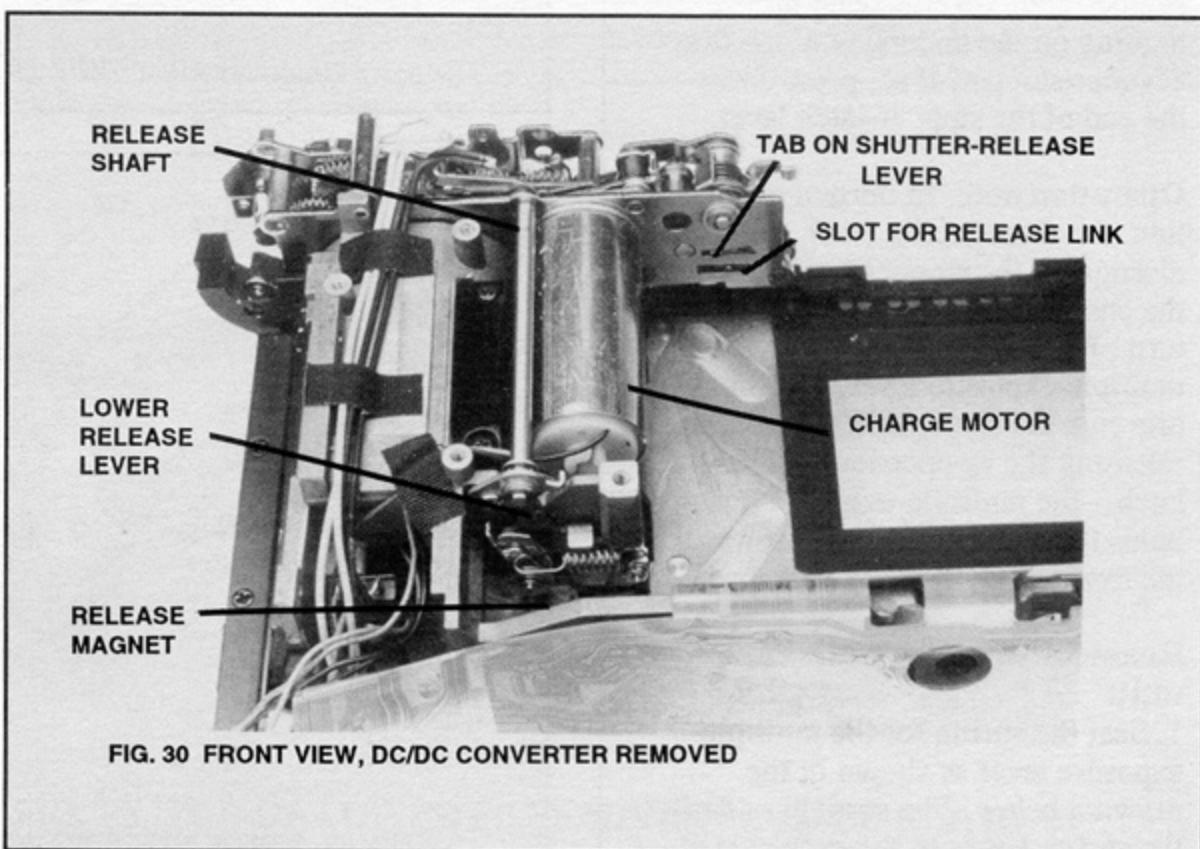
FRONT VIEW, DC/DC CONVERTER REMOVED
